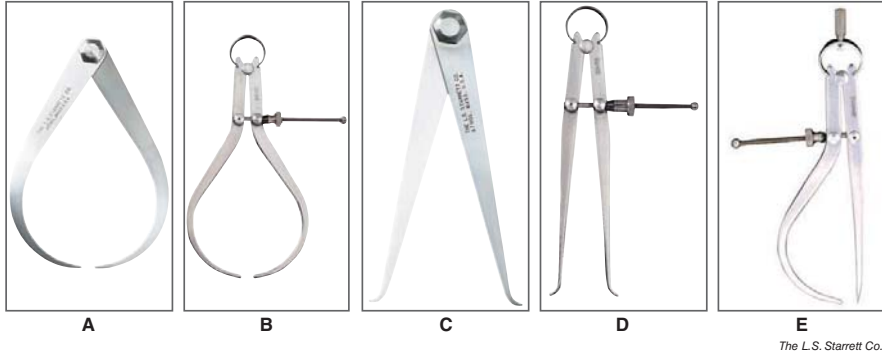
Calipers are used to transfer outside and inside measurements and parallel lines. A—Firm-joint outside calipers. B—Bow-spring outside calipers. C—Firm-joint inside calipers. D—Bow-spring inside calipers. E—Hermaphrodite calipers.
